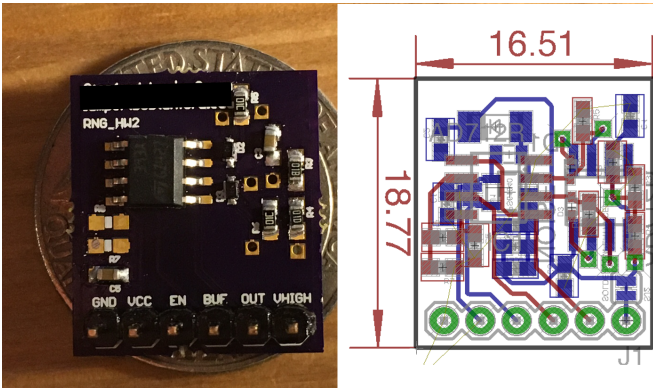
Standalone RNG board. On the left is final design over a US quarter; on the right is the printed circuit board layout with dimensions in mm.
